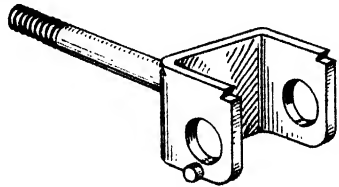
Part for a number stamp now die cast in one piece. Formerly the stem and two pivot pins were screw-machine products and the U-shaped end was blanked, pierced, and formed and then riveted to the stem, making a far more expensive assembly than the one-piece die casting.
